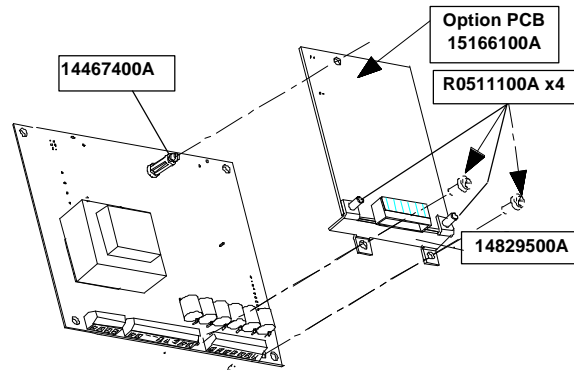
Mounting PROFIBUS Option PCB in Panel Mount Enclosure
